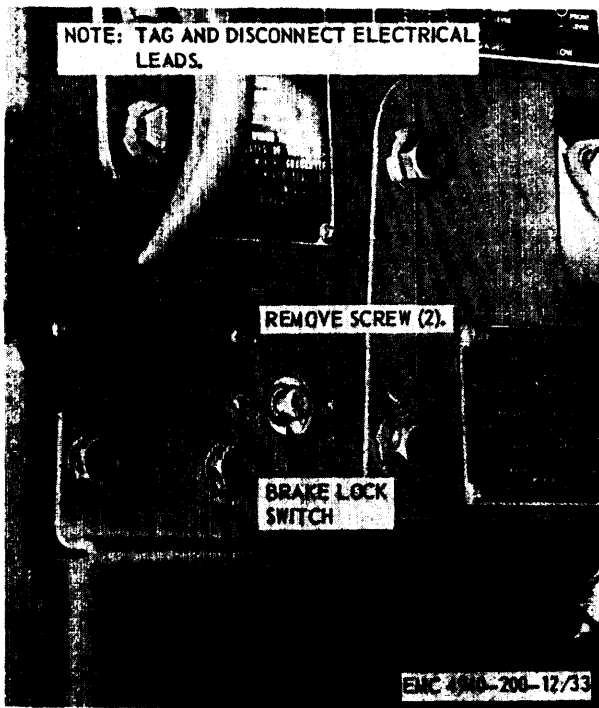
Electric brake lock switch, Model SECM, removal and installation.
